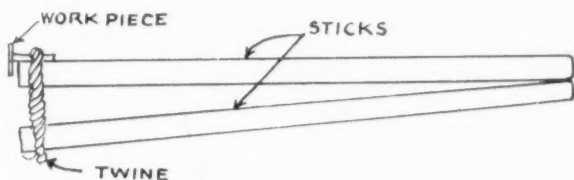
A tourniquet-type of holder for polishing and buffing the heads of studs, bolts, etc. Note how work is held by twine.
